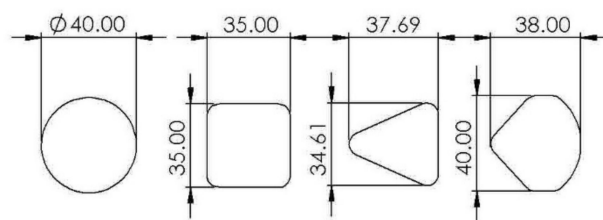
Top tube cross-sections from left to right: circular 40 mm, rectangular 35 × 35 mm, triangular, and complex.
